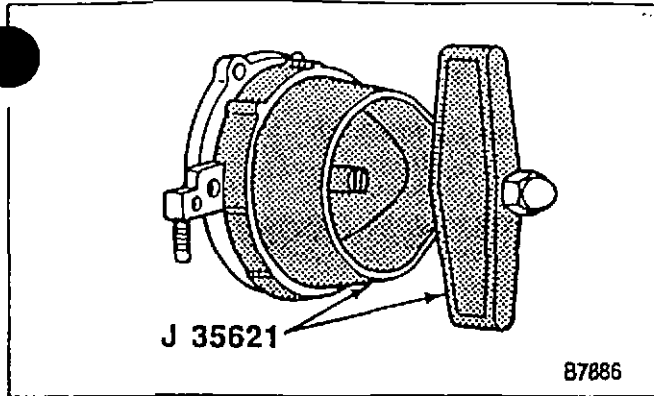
Installing the Crankshaft Rear Oil Seal (5.0L and 5.7L Engines)
